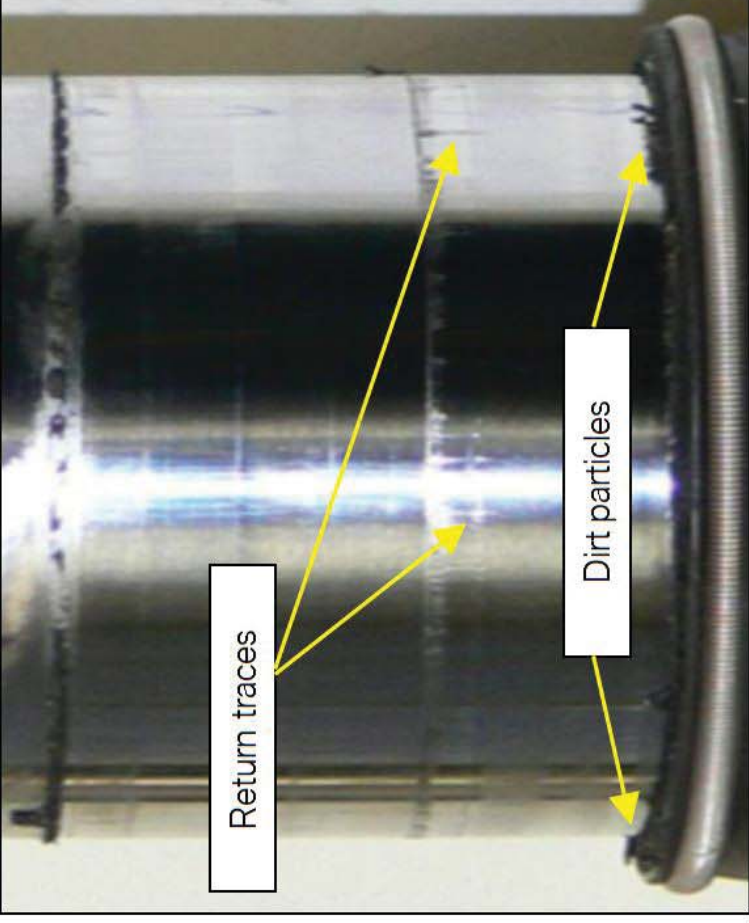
fixed fork tube with initial traces of return on wiper ring
